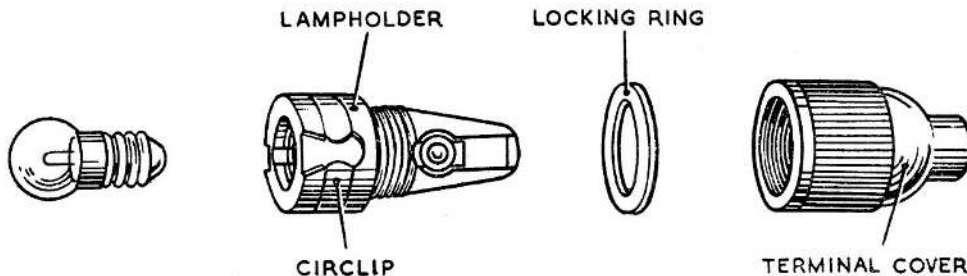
Instrument lamp, Type C, with locking ring and terminal cover
